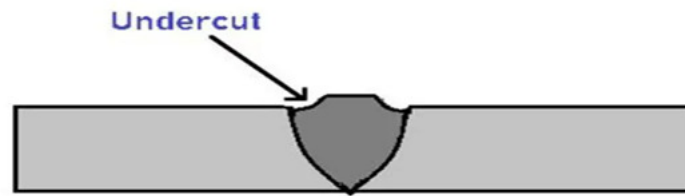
Representing the Undercut section of welding [The Engineers Post].
